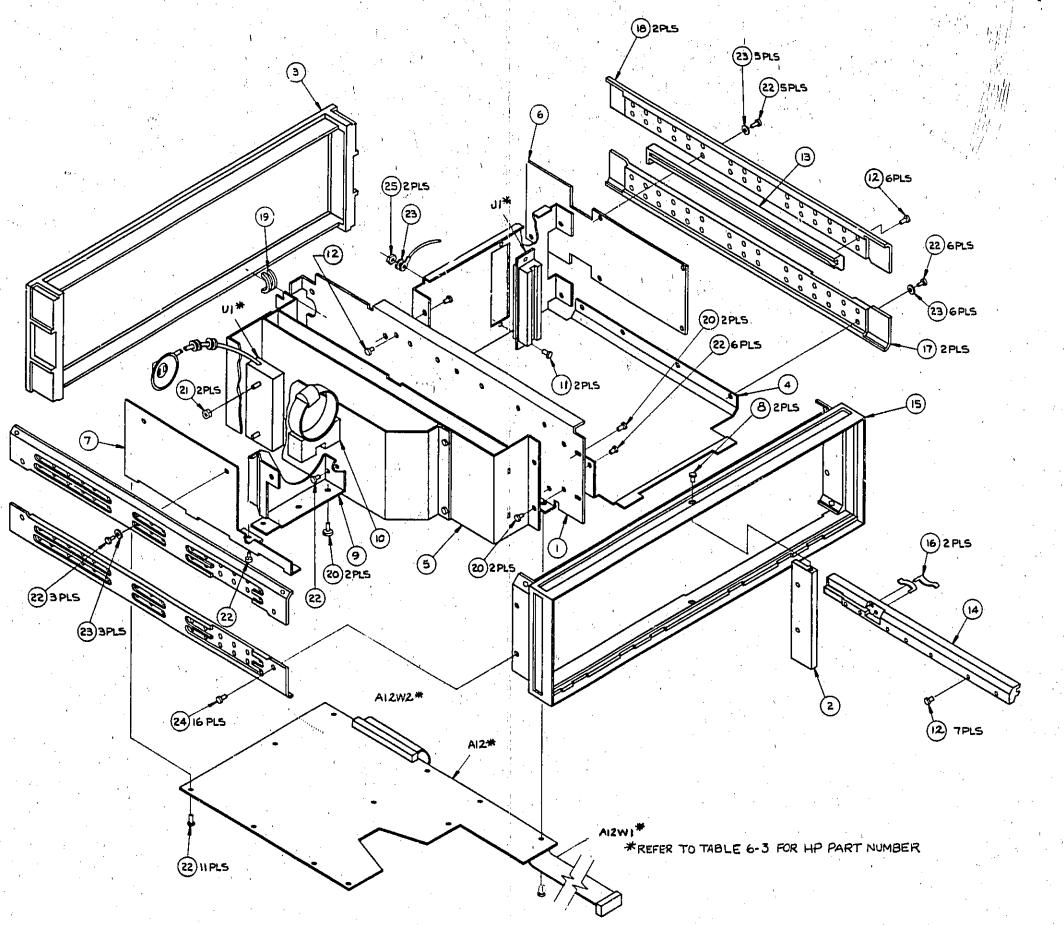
Frame Assembly, Parts Locations 6-31/6-32
